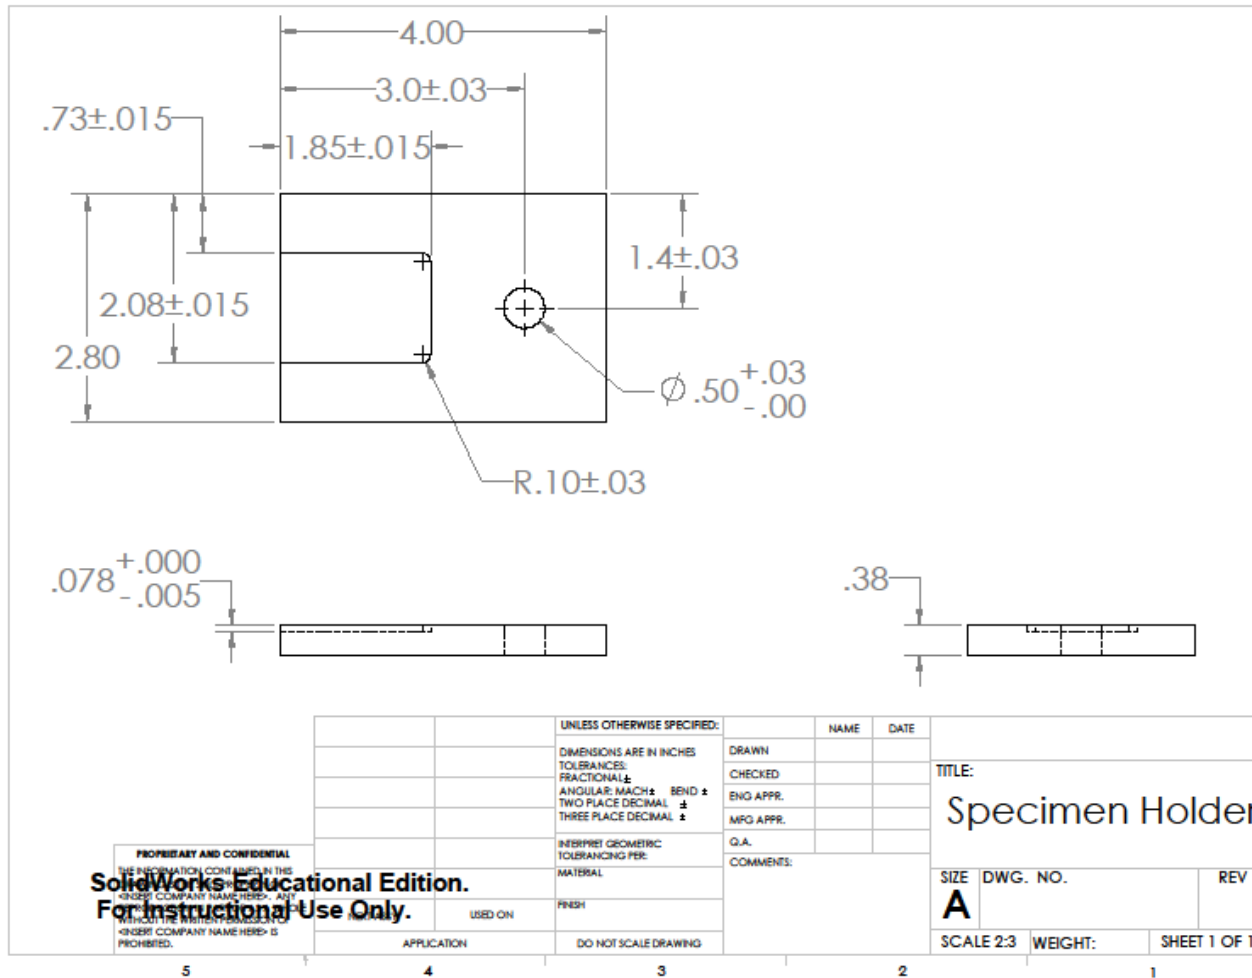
Technical drawing of the copper specimen holder. All dimensions in inches.
